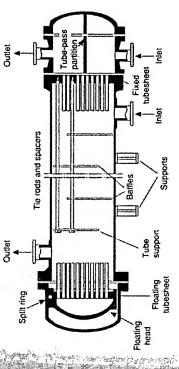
Heat exchanger with floating head (two tube-pass, one shell-pass)
